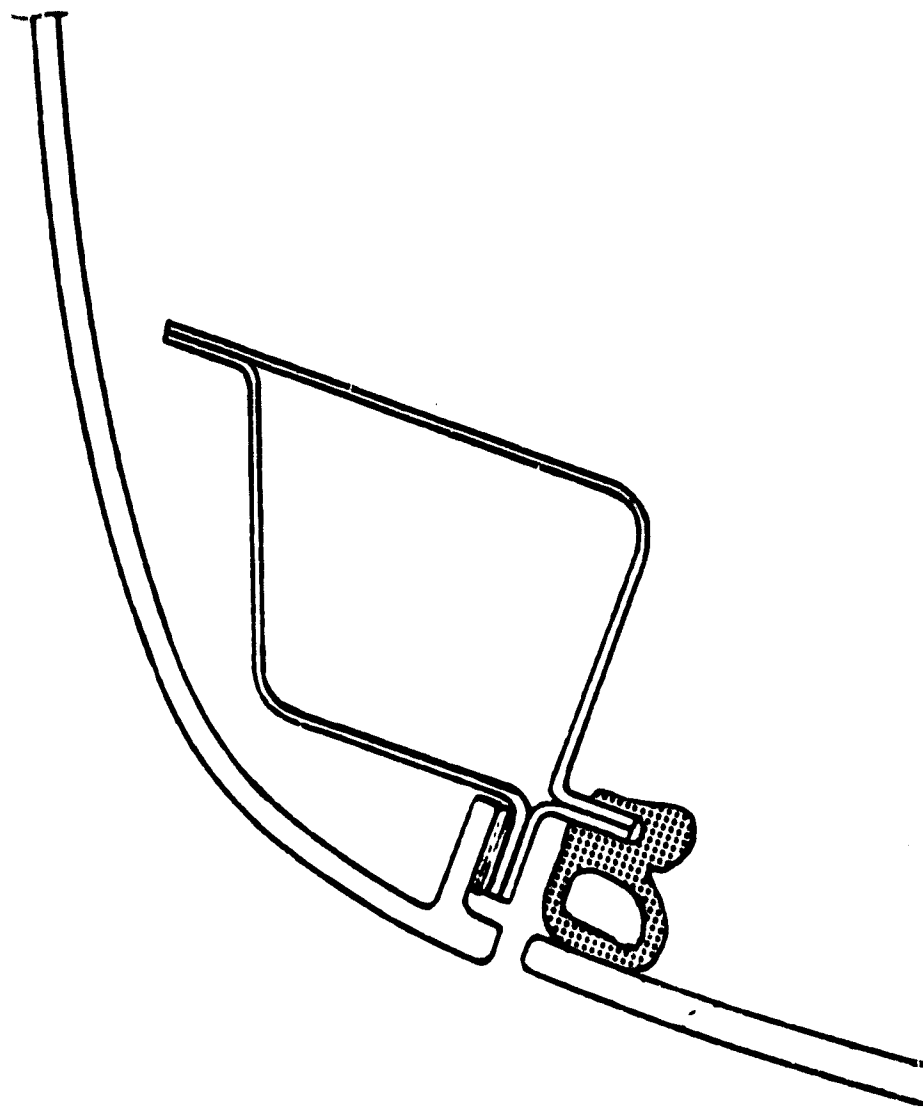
ROOF/UPPER DOOR EDGE SECTION
